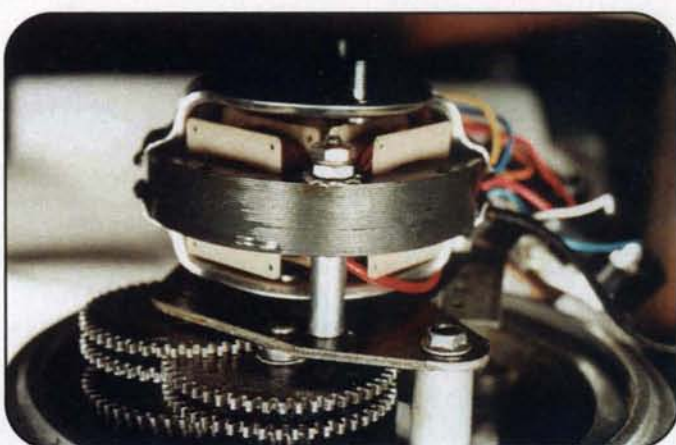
Turn the upper spur gear to move the ring gear (see step 31).
